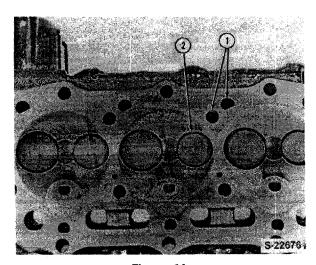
Cylinder Head Inspection 1. Cylinder Head Ports 2. Valve Seat
